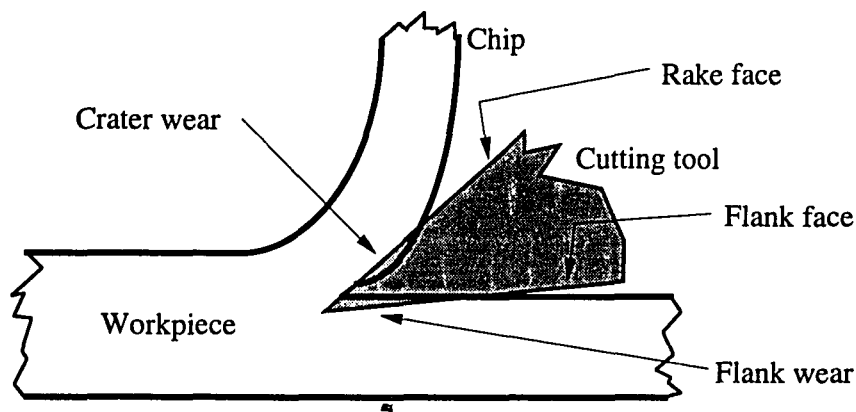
Regions of tool wear on a cutting tool in turning process
